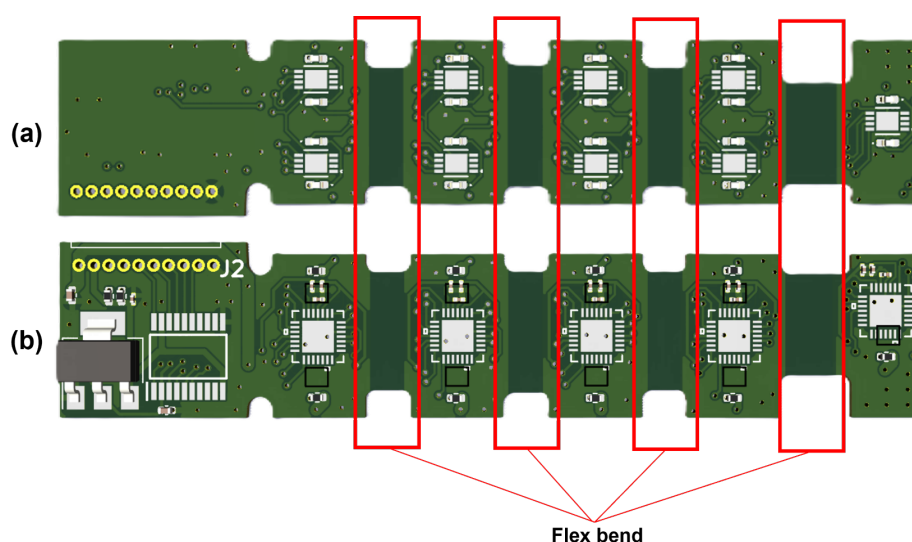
KiCad design of the rigid-flex PCB for LiVec sensor array: (a) top view and (b) bottom view. The rigid sections host sensors and LEDs, while the flex sections provide compliance for embedding into the soft finger.
